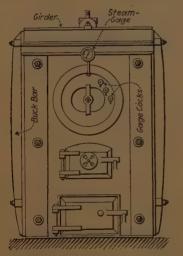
Front elevation of plaincylindrical boiler. (A gage glass in addition to gage cocks are supplied on modern cylindrical boilers.)
